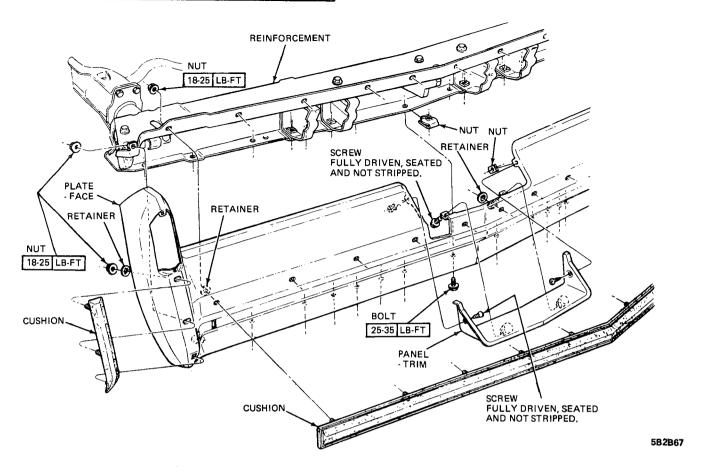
B-67 C Series Rear Bumper Face Plate and Cushions
